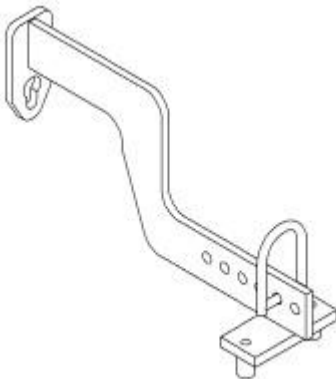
ENGINE LIFT FIXTURE - 8984A
